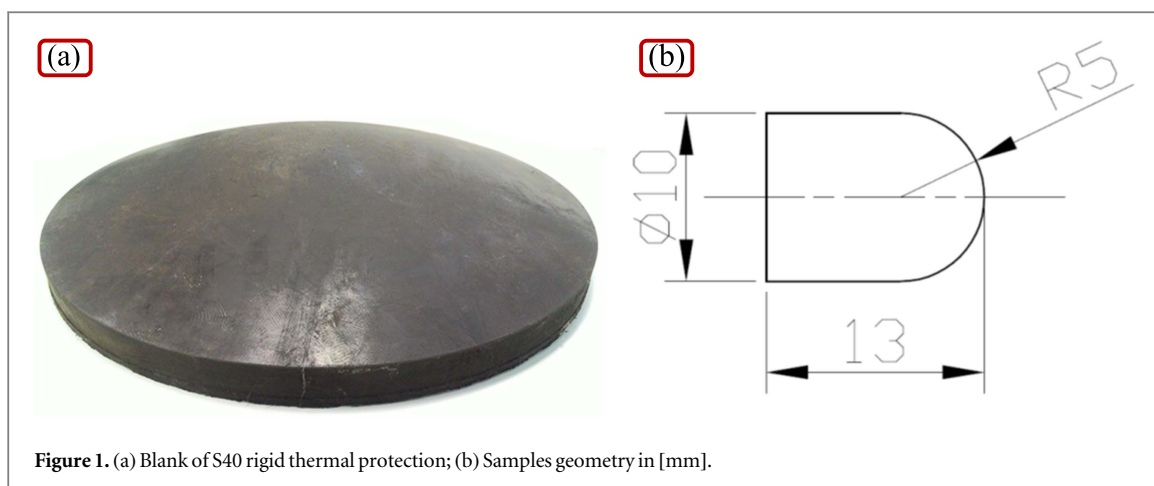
(a) Blank of S40 rigid thermal protection; (b) Samples geometry in [mm].
